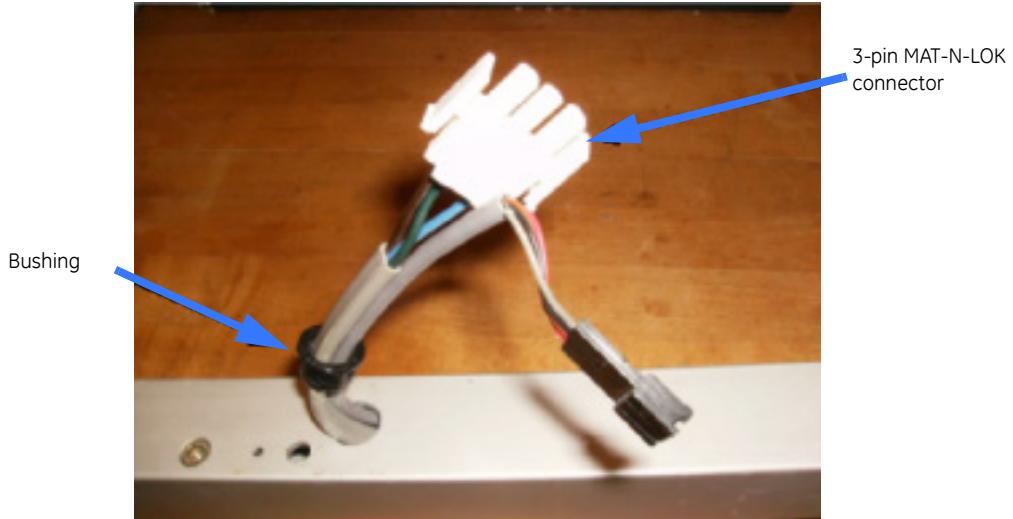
3-pin MAT-N-LOK Connector and Bushing
